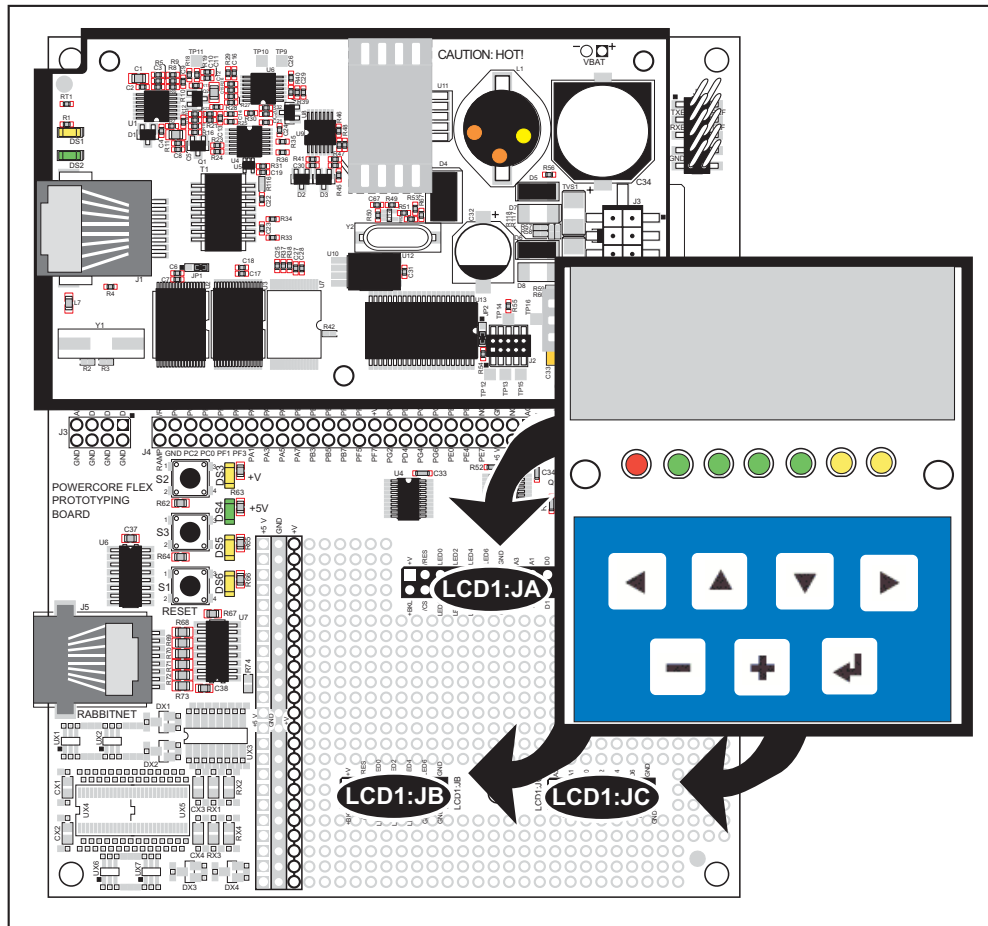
Solder Connectors to RC3800 Prototyping Board
